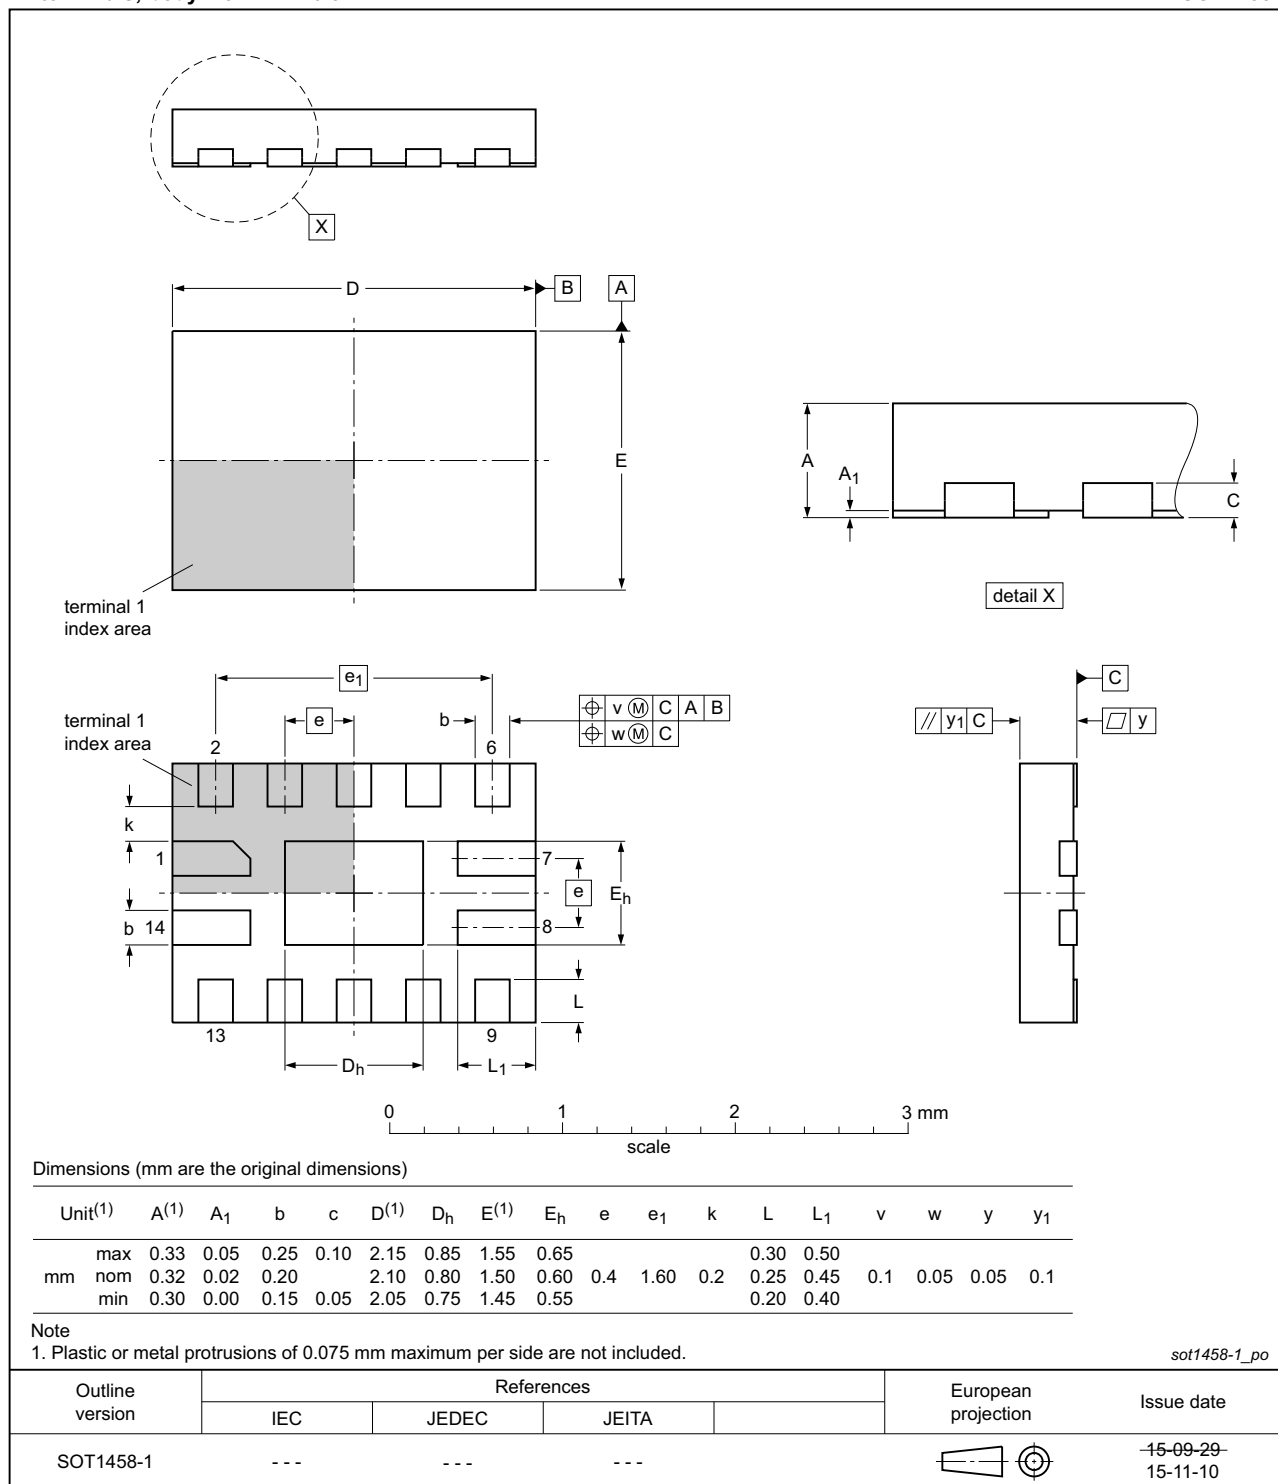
Package outline SOT1458-1 (DHX2QFN14)
